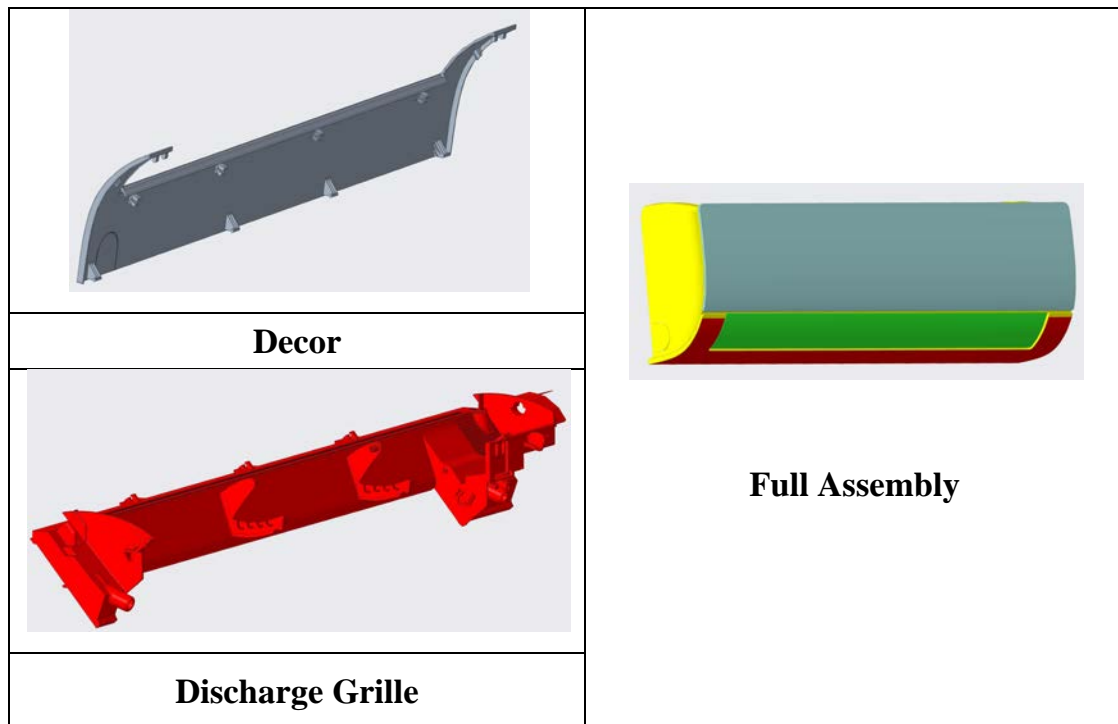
3D Data of Decor, Discharge Grille and Full Assembly
